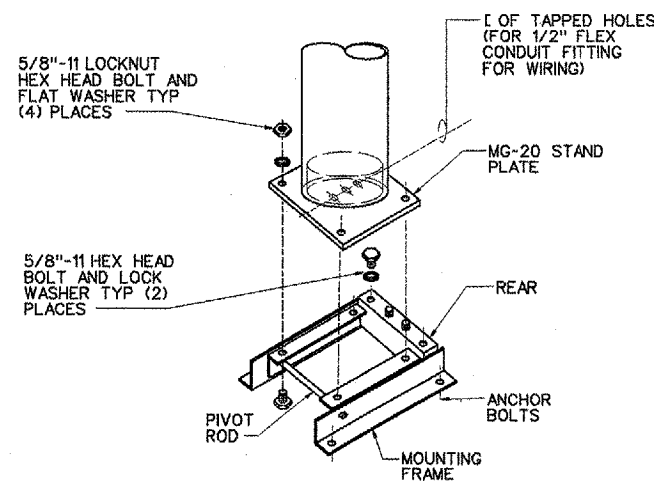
MOUNTING STAND ASSEMBLY MG-20
